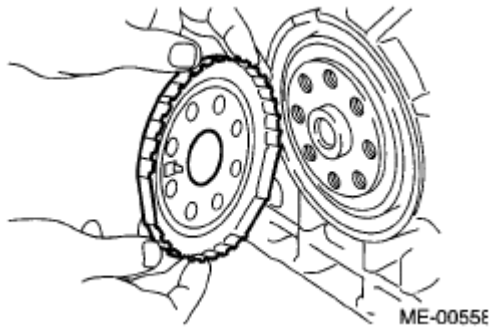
Removing/Installing Crankshaft Position Sensor Plate
